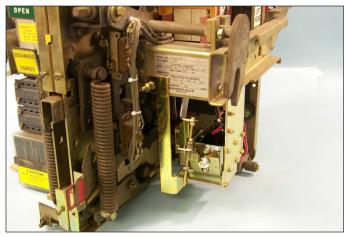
Overview: DTA Assembly Installed in the Breaker.
